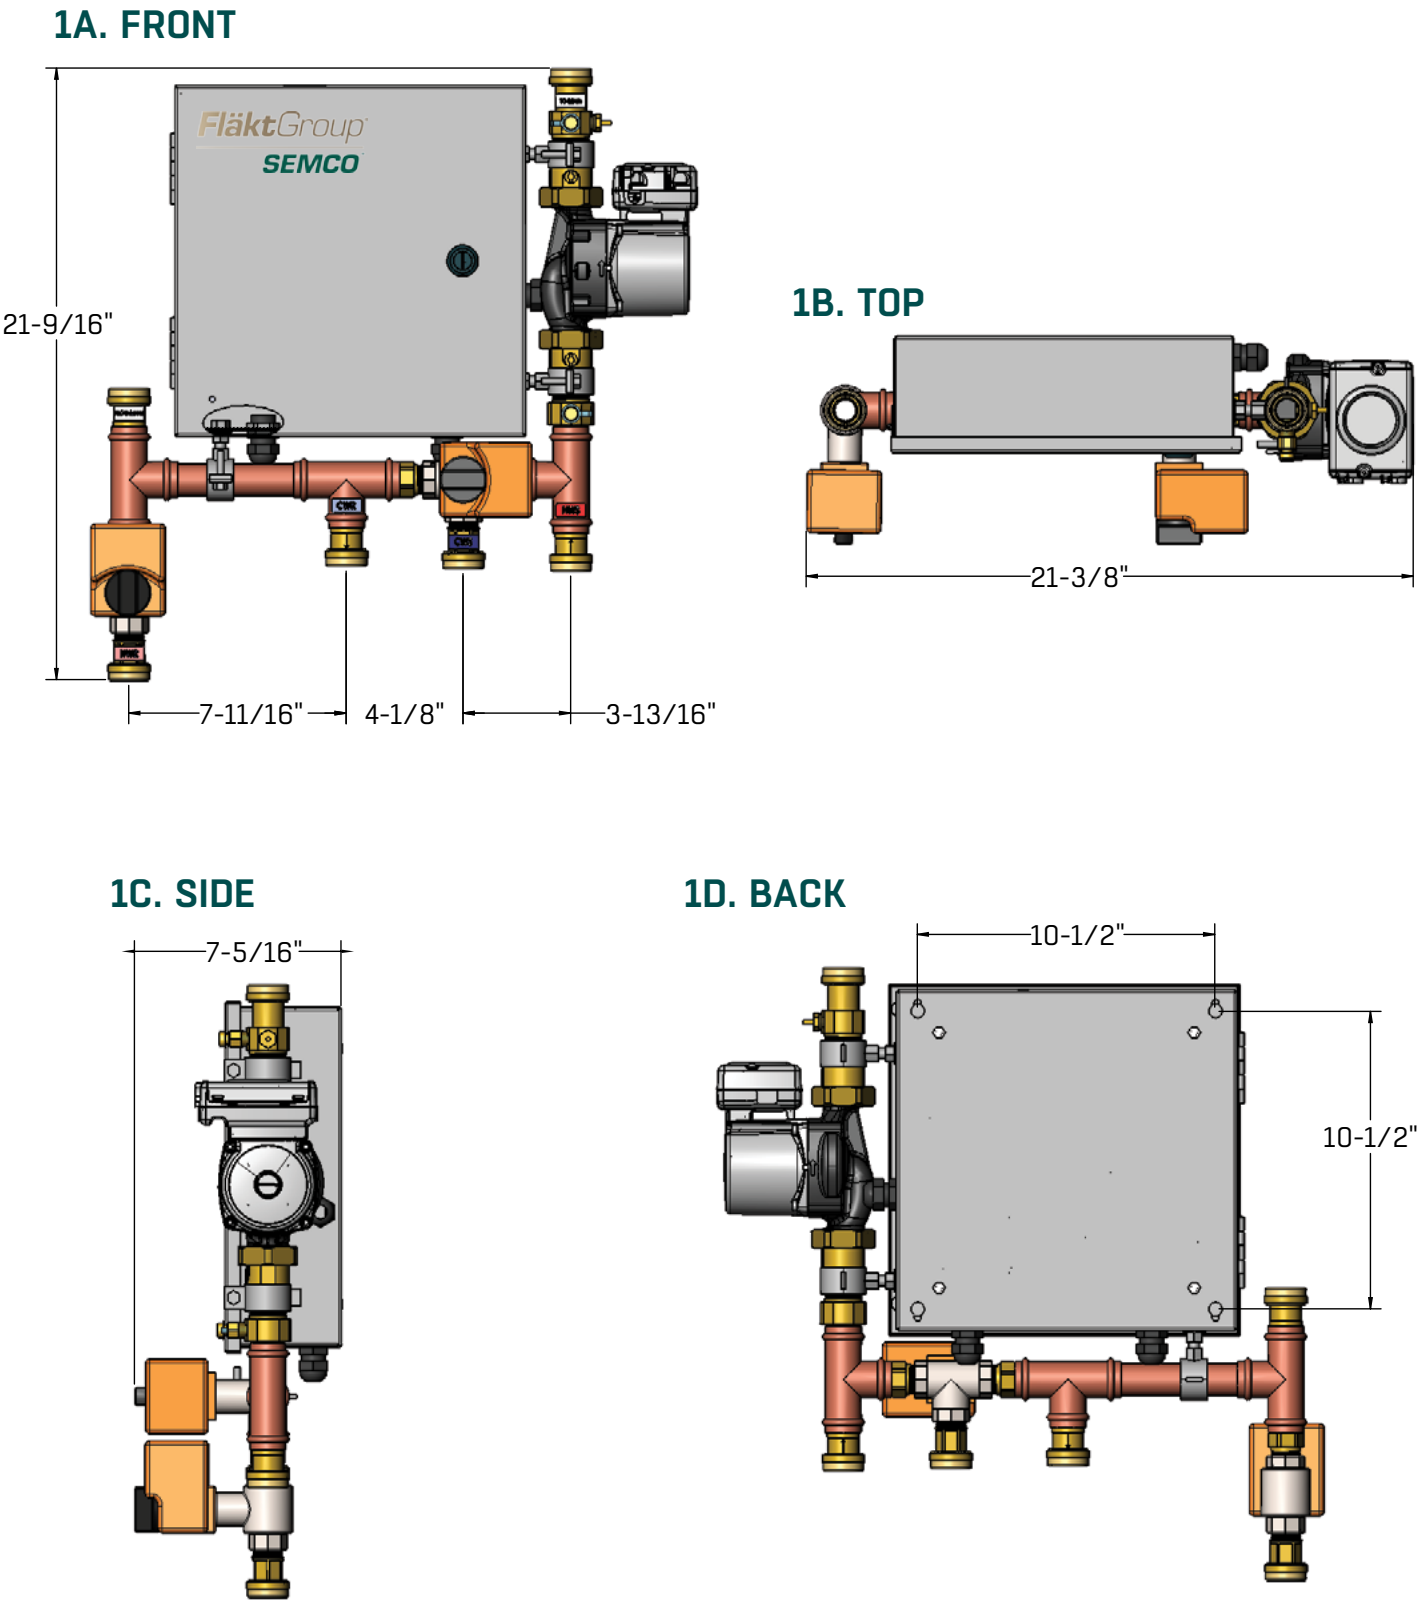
Dimensions of the NEUTON® Dual Valve Pump Module from the front (A), top (B), side (C), and back (D).
